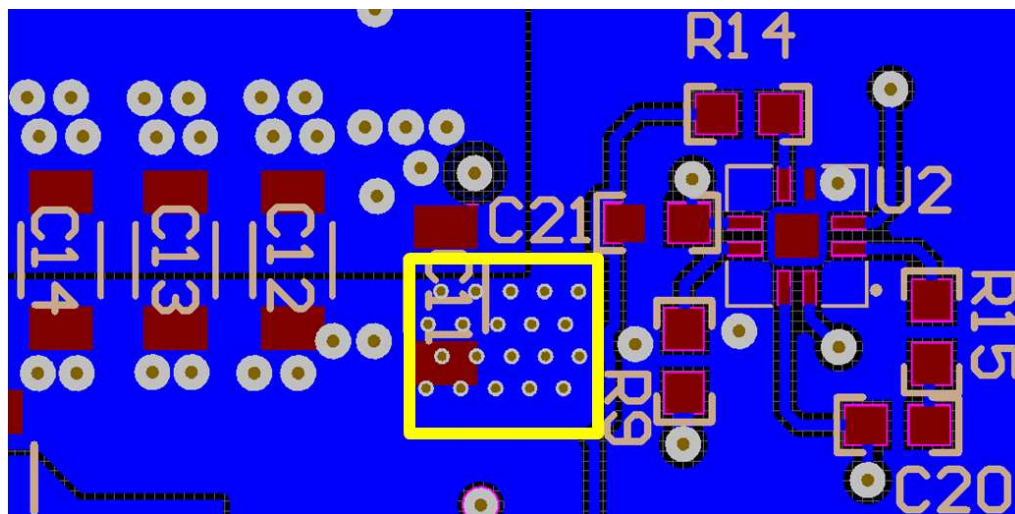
Recommended PCB Layout (Bottom View) ⁽²⁾
